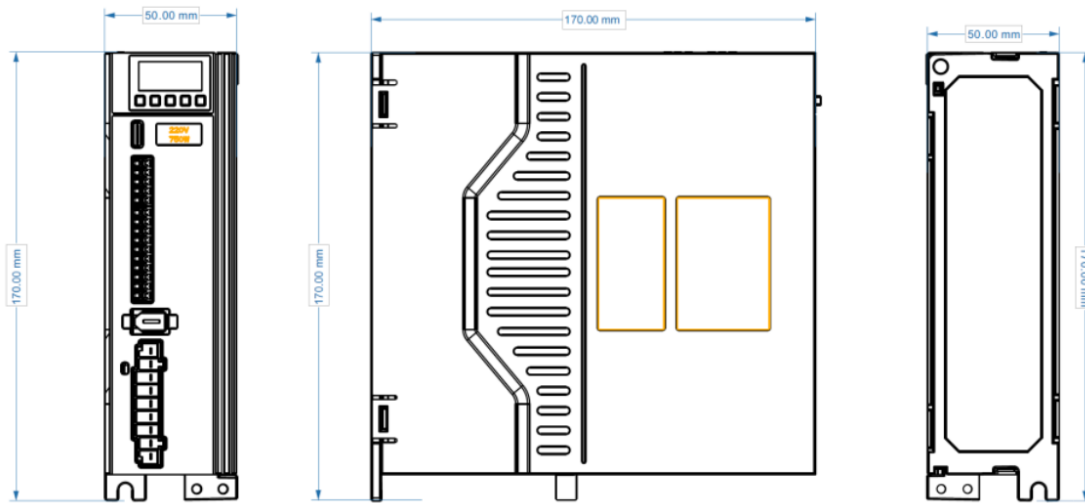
Dimension drawing of S8P(Z)-400/ S8P(Z)-750
